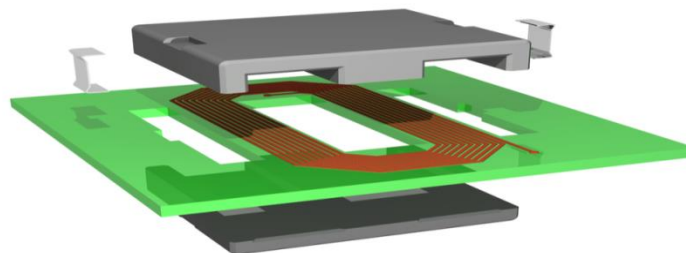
The winding layer of a planar transformer on the PCB. Image from Wikipedia.
